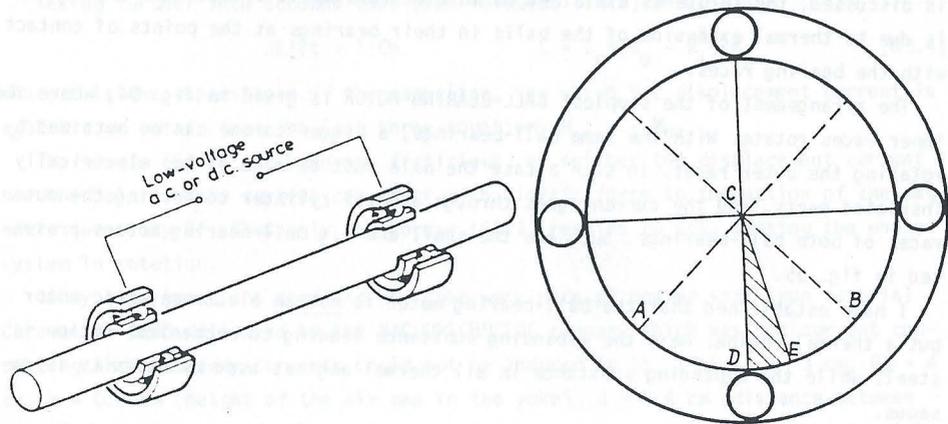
Diagram of the ball-bearing motor with cross-section of the bearings.
